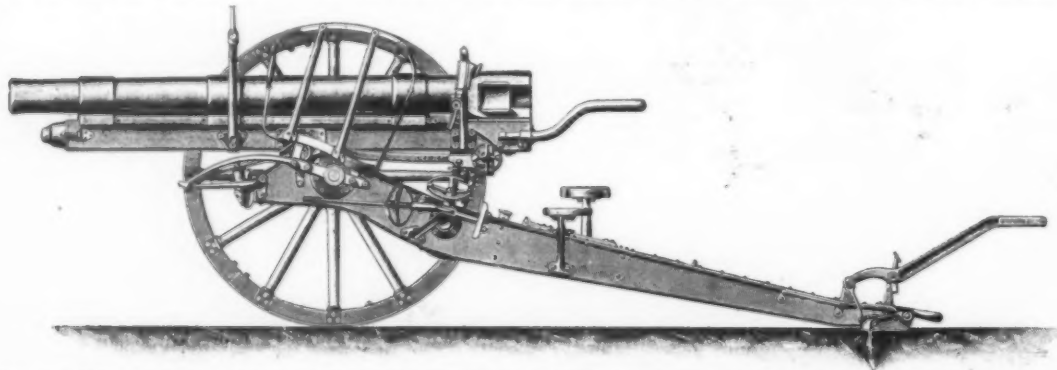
7.5-CM. FIELD GUN "L/30" MOUNTED IN CARRIAGE WITH RECOILING CYLINDER "C/1902."
